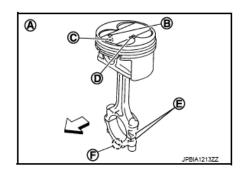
Identifying Mark On Piston Head And Cylinder Number On Connecting Rod Courtesy of NISSAN MOTOR CO., U.S.A.
